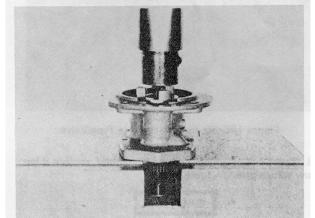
G-35. Press Drive Gear Assembly from Front Cover
